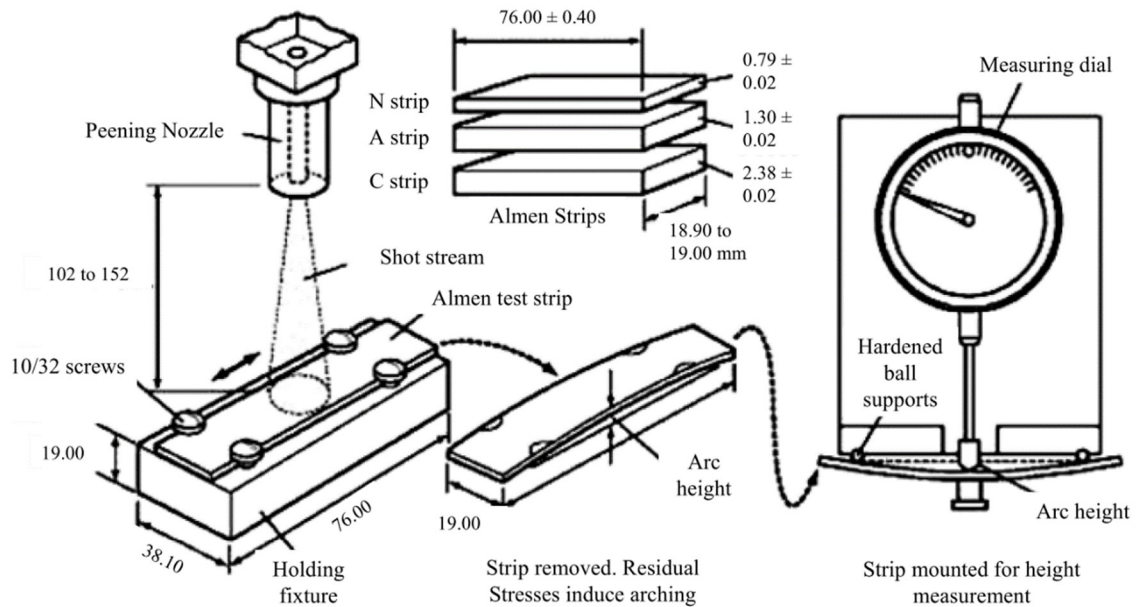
Almen strip system (All dimensions in mm) [116].
